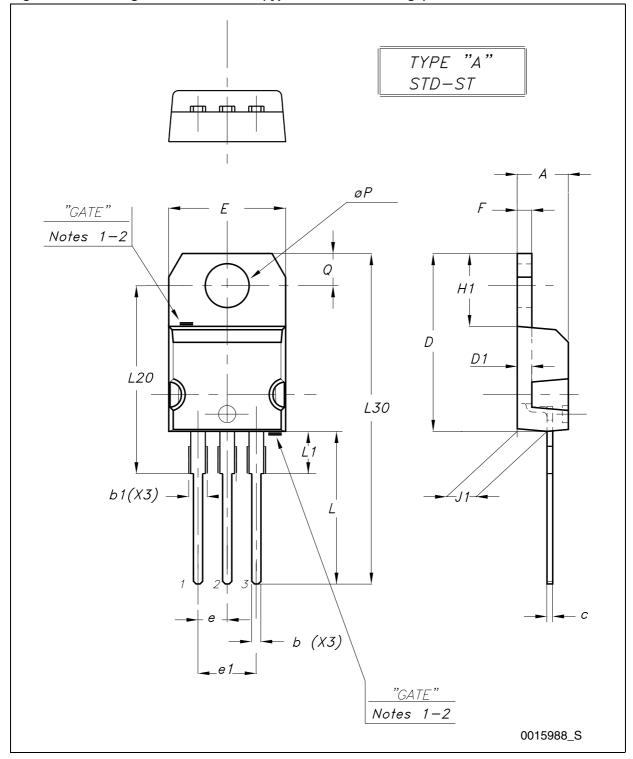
Drawing dimension TO-220 (type STD-ST Dual Gauge)
